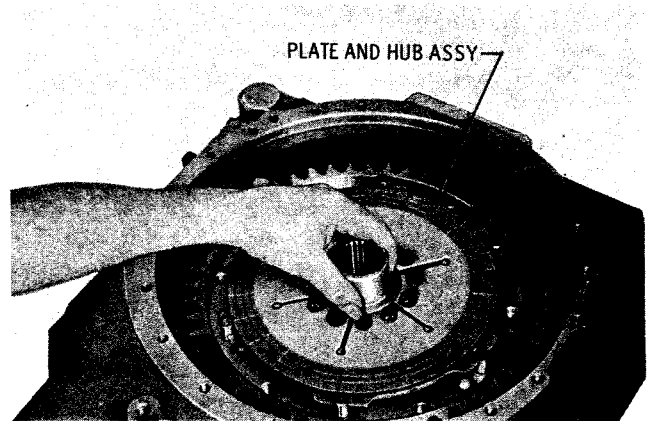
Installing high-range clutch plate and hub assembly (TT, TTB models with power takeoff)
